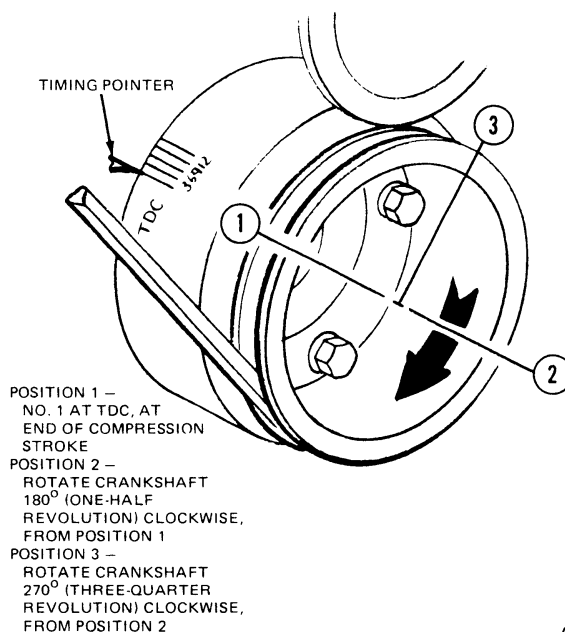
Checking Valve Clearance—Hydraulic Valve Lifters
